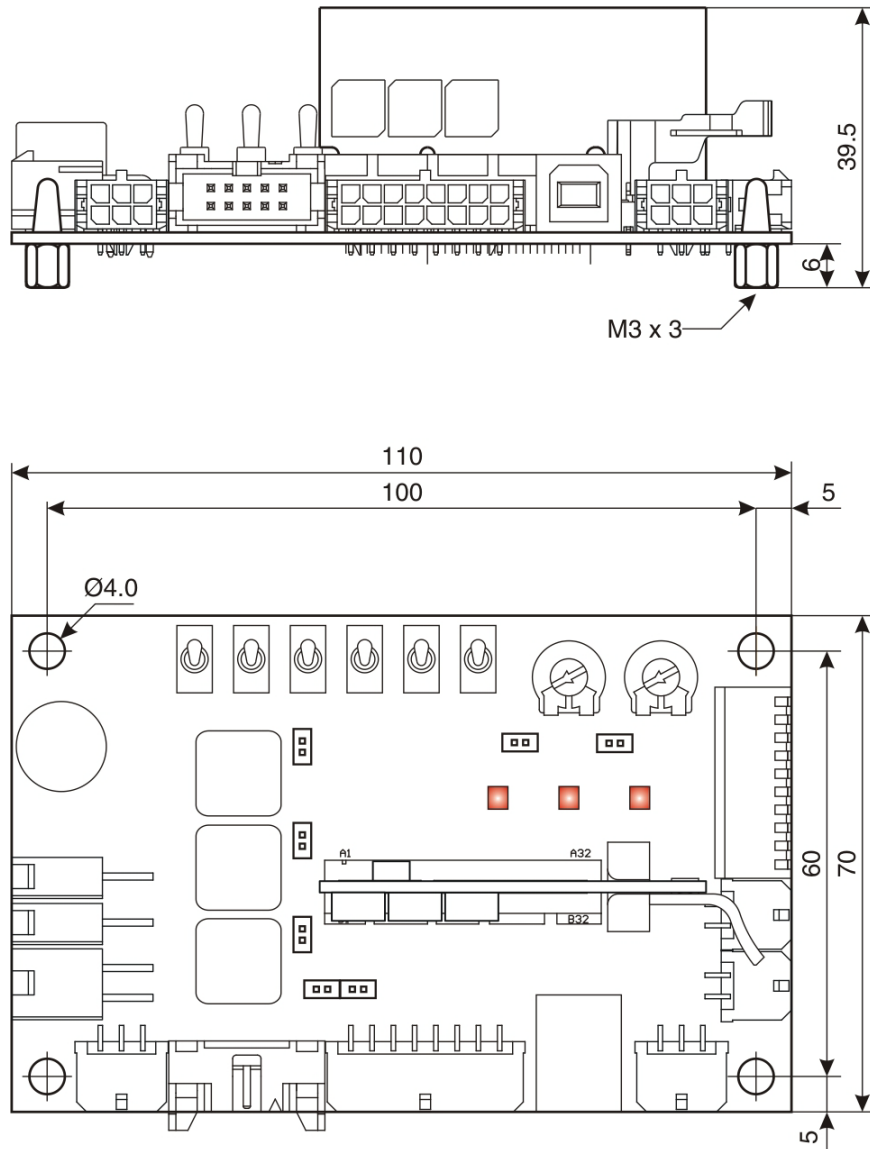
Dimensional Drawing – EvaBoard with EPOS2 Module 36/2
